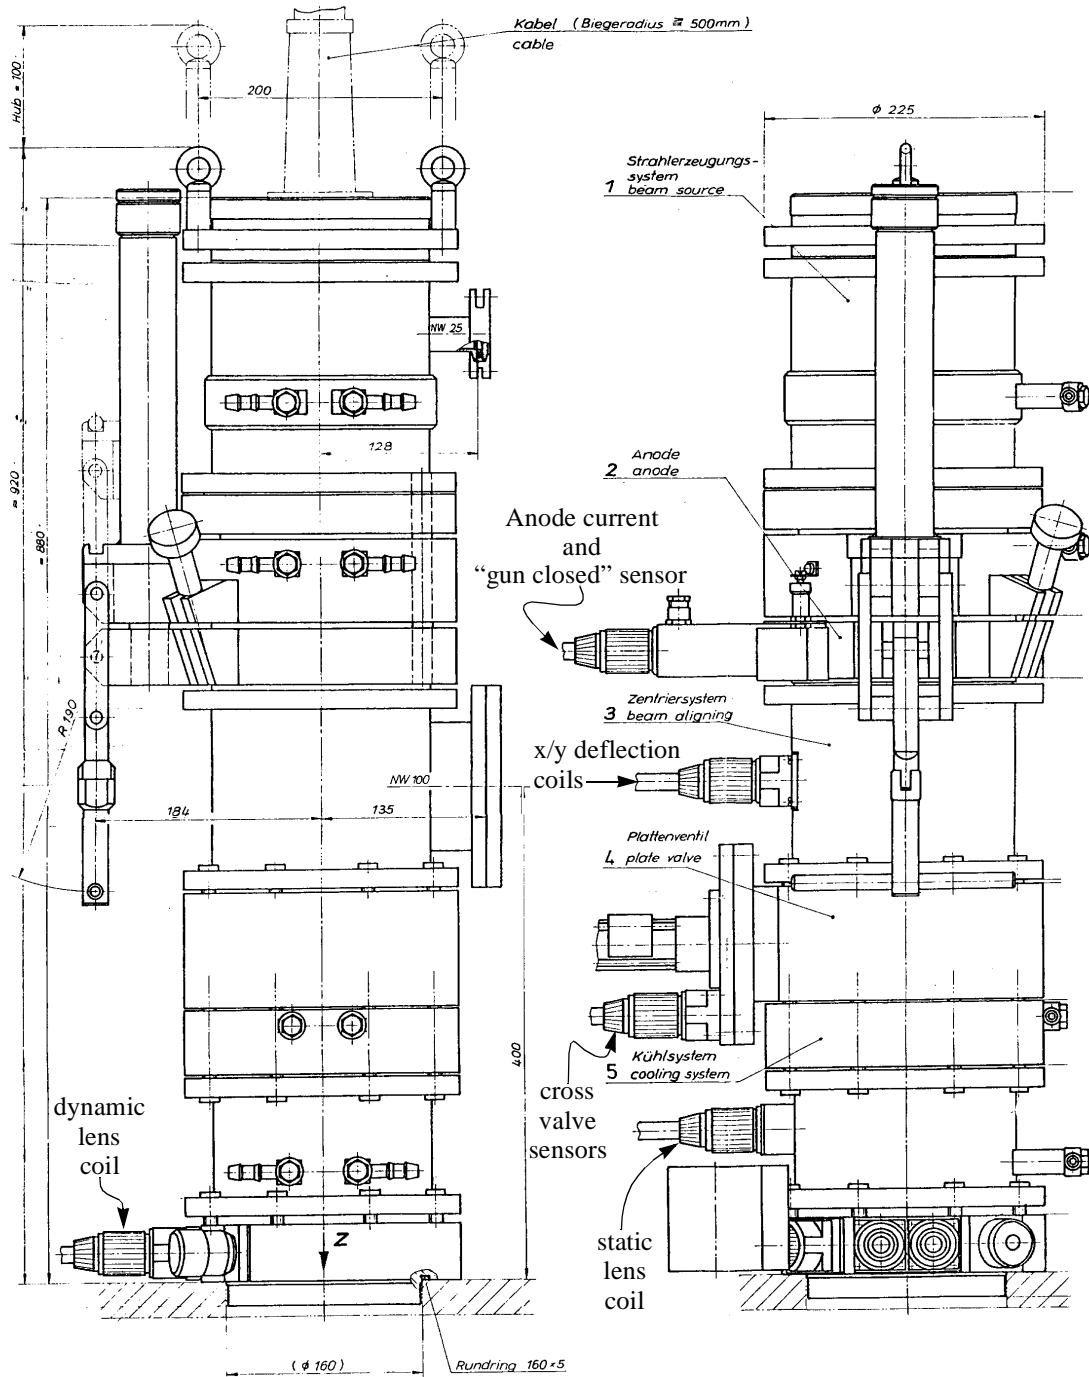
Overview drawing of traditional components of DVD e-beam gun. The pressure decoupling system unique to the DVD system is not shown.
